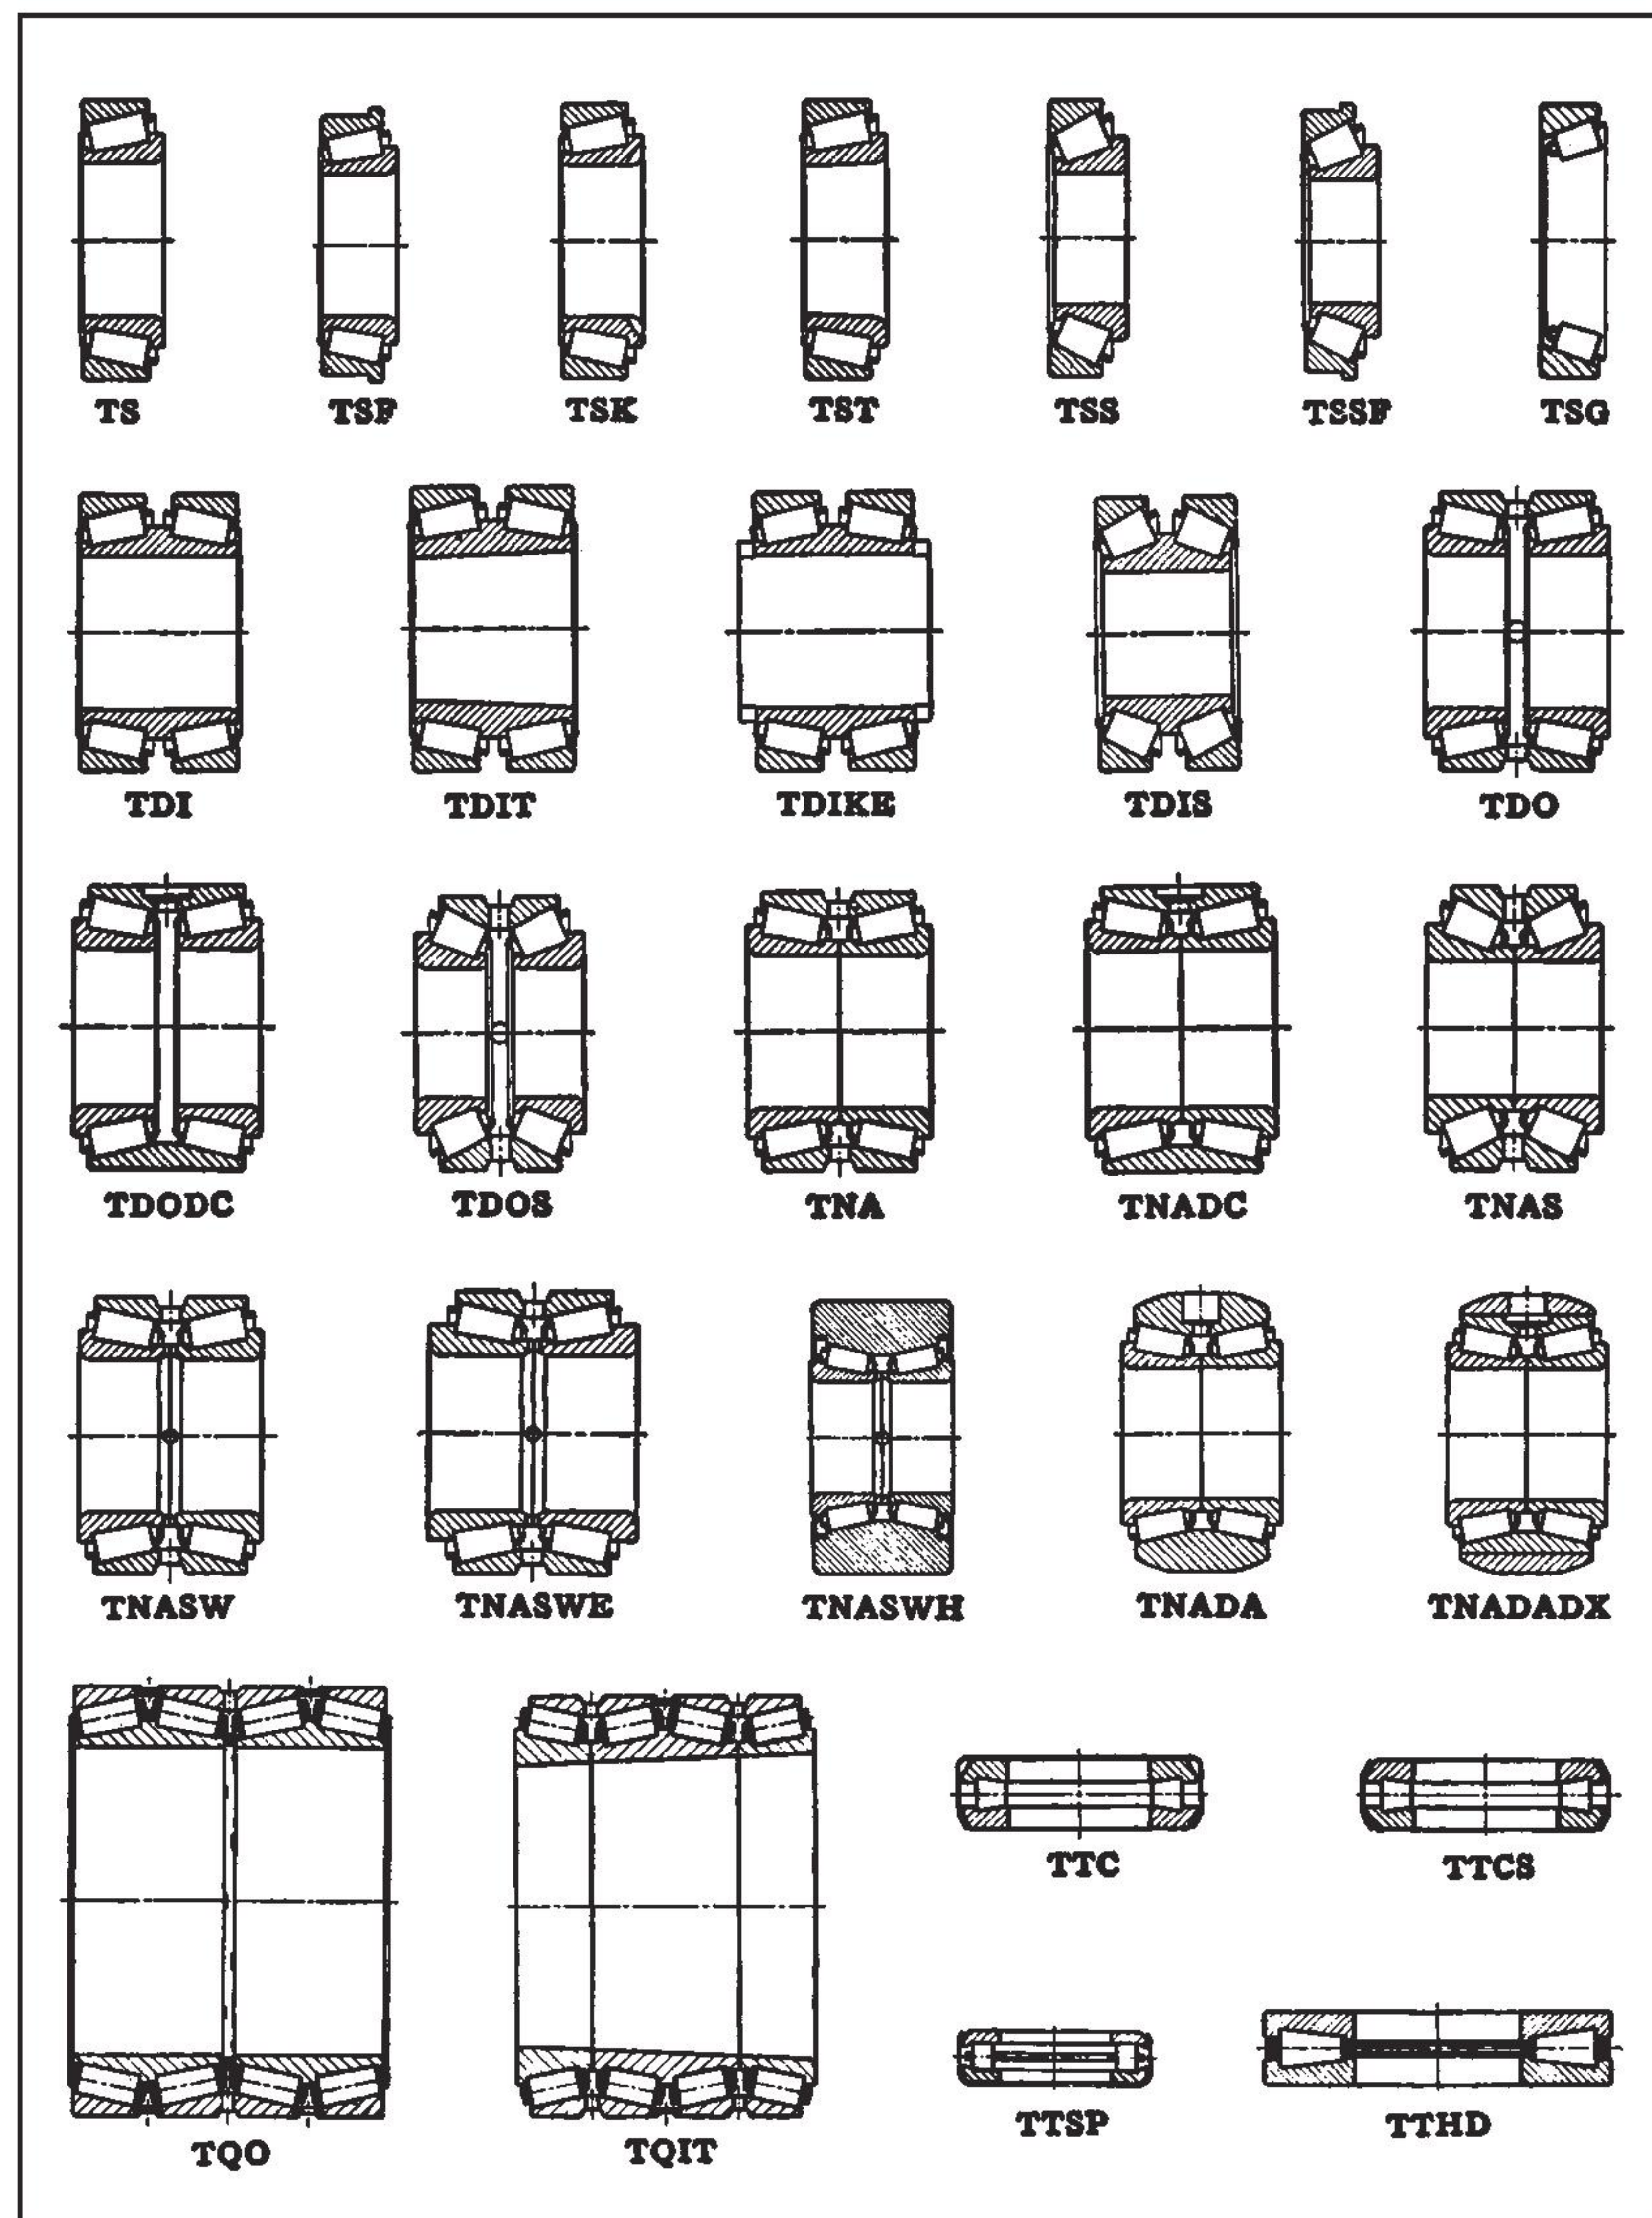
Tapered roller bearings, single-row, multiple-row, and thrust.
